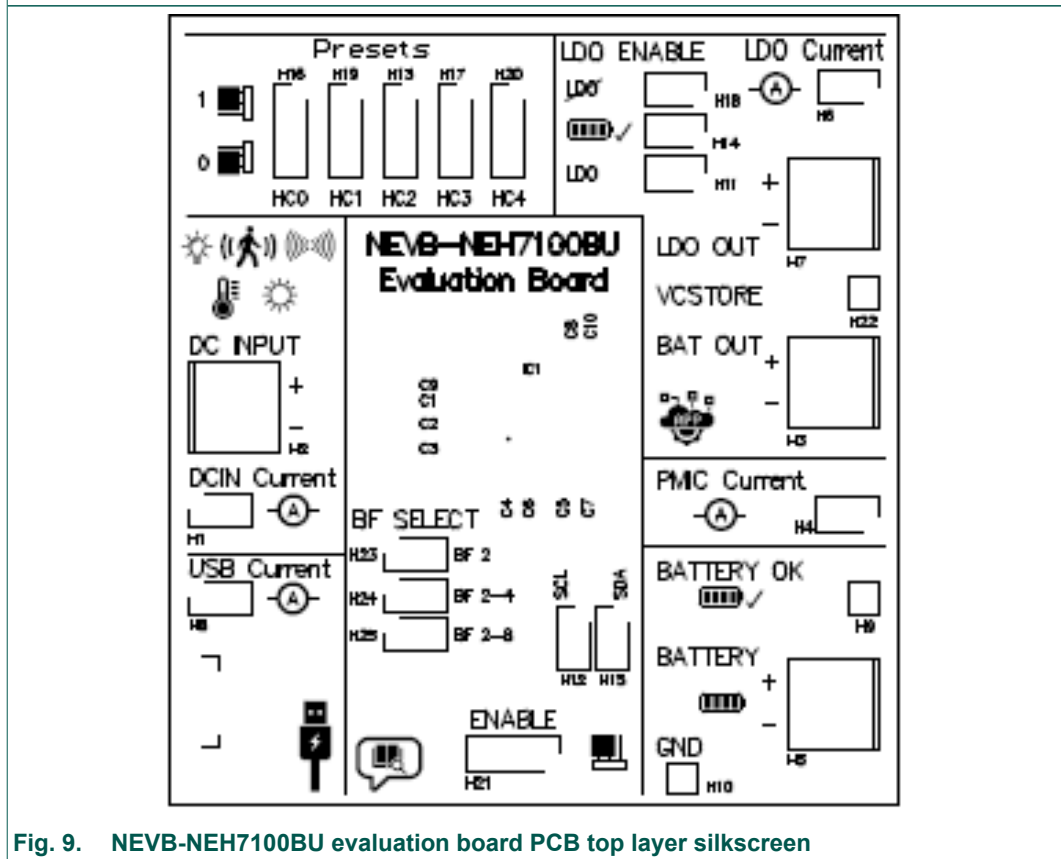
NEVB-NEH7100BU evaluation board PCB top layer silkscreen
